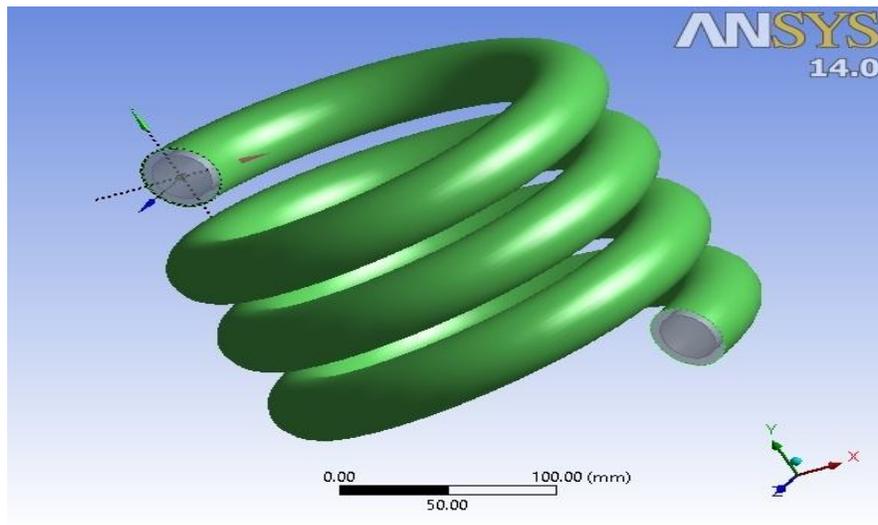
A schematic diagram of multi tubes in tube helical heat exchanger
